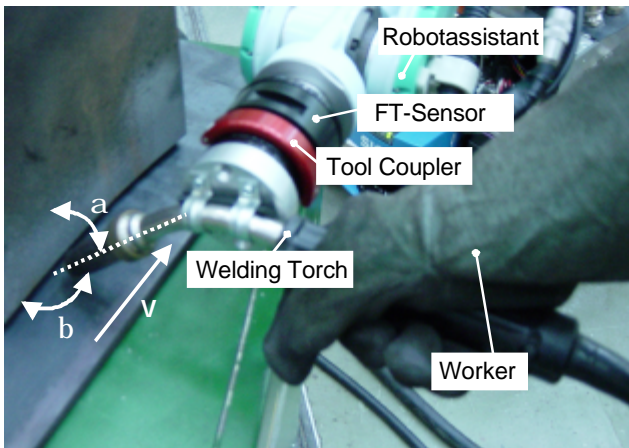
Prototype of robot assistance for manual arc welding
